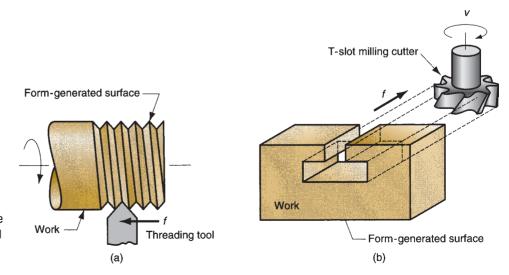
Combination of forming and generating to create shape: (a) thread cutting on a lathe, and (b) slot milling.
